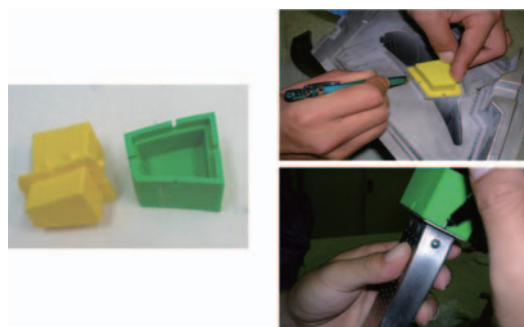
Scribing jig for welding of turbine vane inserts
